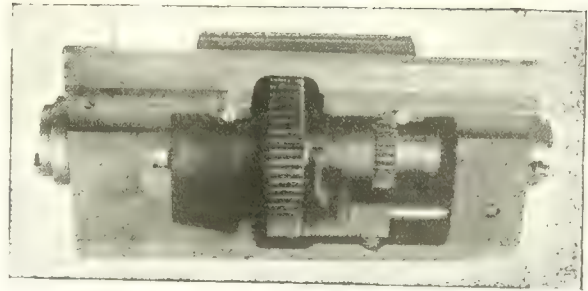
DETAILED VIEW OF SPINDLE HEAD
